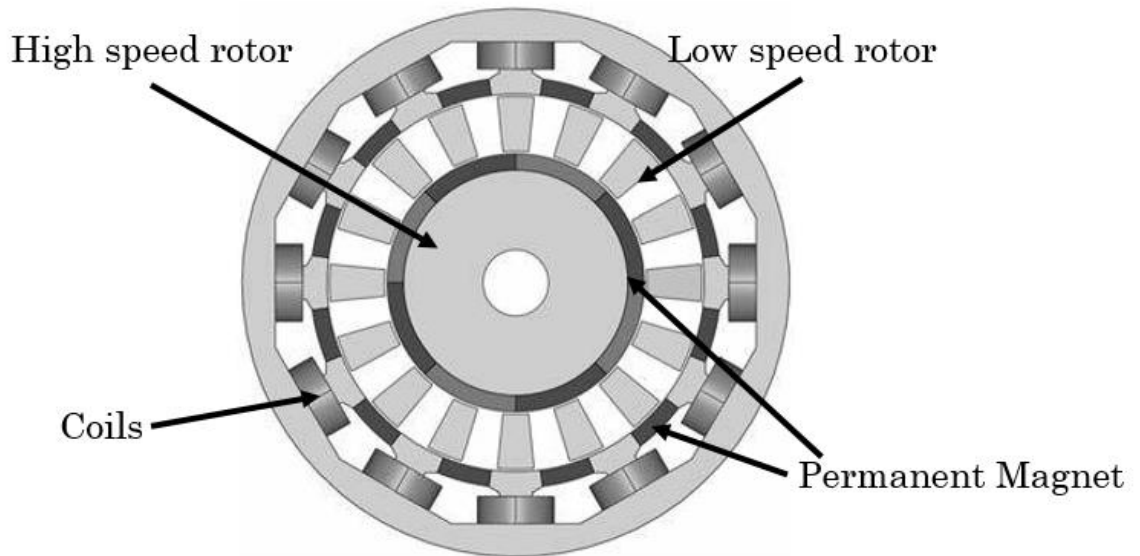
Niguchi's high torque type magnetic geared motor[20]
